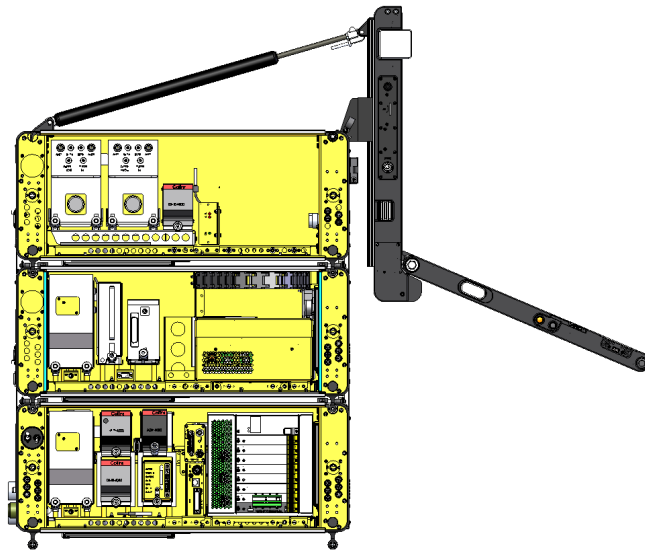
Mechanical drawing of a console where the cover on the side is removed. This gives the possibility to mount and disassemble equipment without the physical items.
